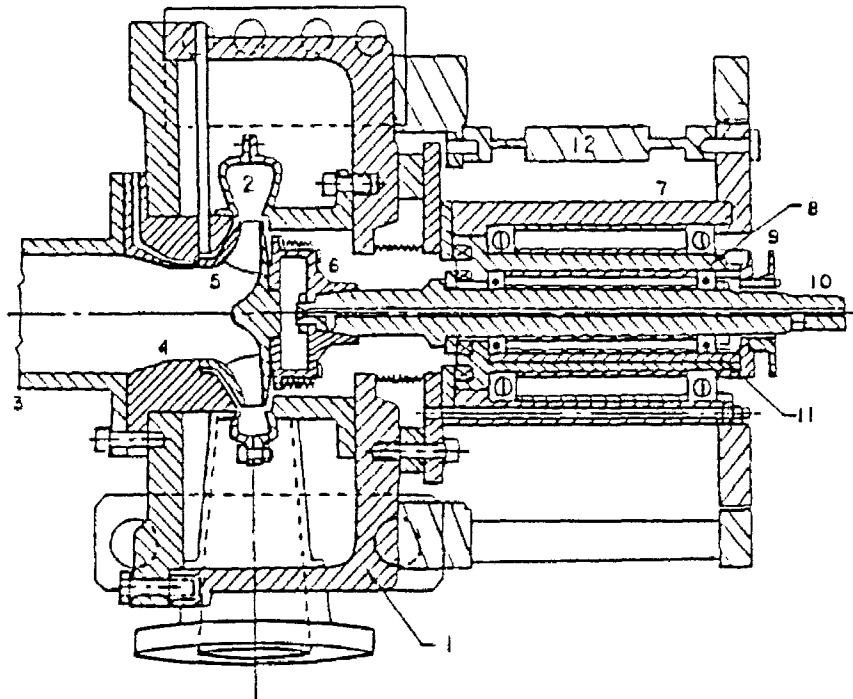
Rotor Force Test Facility: (1) pump housing, (2) volute, (3) inlet duct, (4) inlet bell, (5) impeller, (6) internal balance (7,8,11) double bearing system (9) whirl motion sprocket (12) external balance flexure (pinned when using internal balance).
